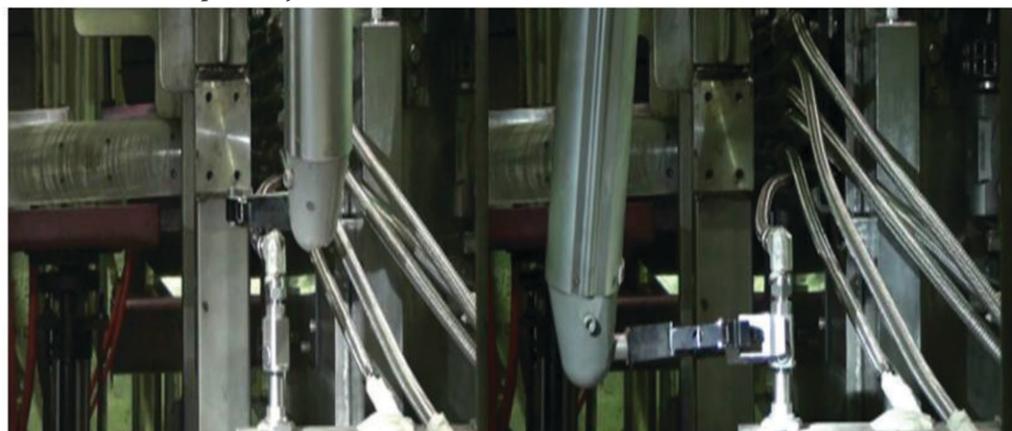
Hydraulic connectors for decoupling and coupling operations using MSM
